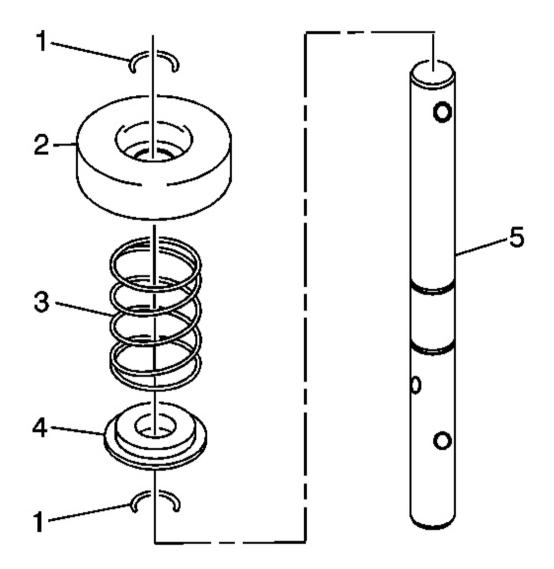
Exploded View Of Shift Rod Assembly Courtesy of GENERAL MOTORS CORP.
